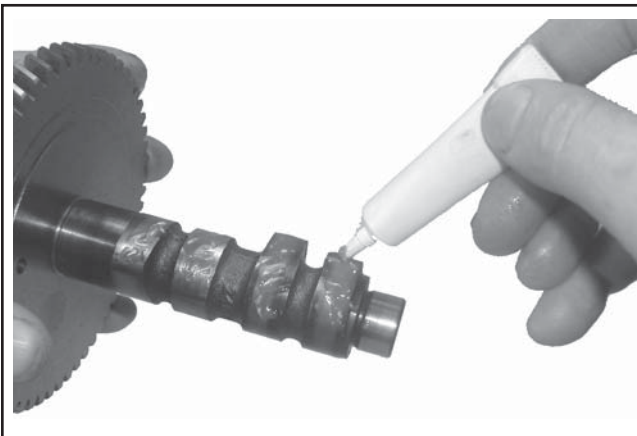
Applying Camshaft Lubricant to Valve Tappets.
